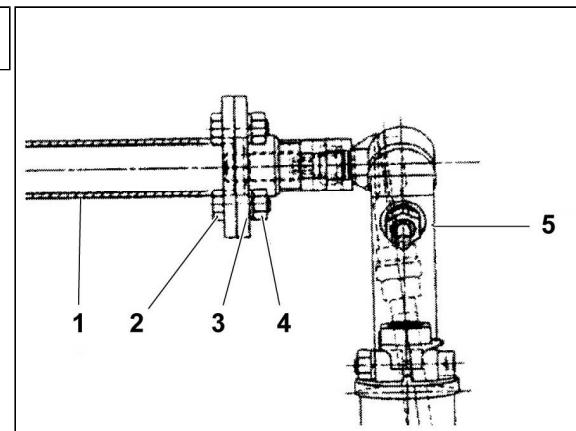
Installation of the gearshift lever c/w shifter rod bracket
